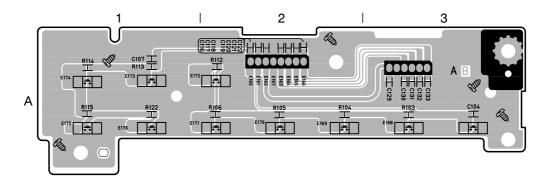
EU03B Front (L) PC Broad (Bottom side)
